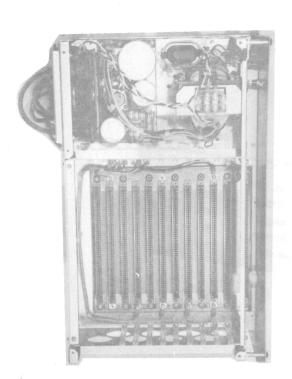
ASSEMBLY WITHOUT COVER
